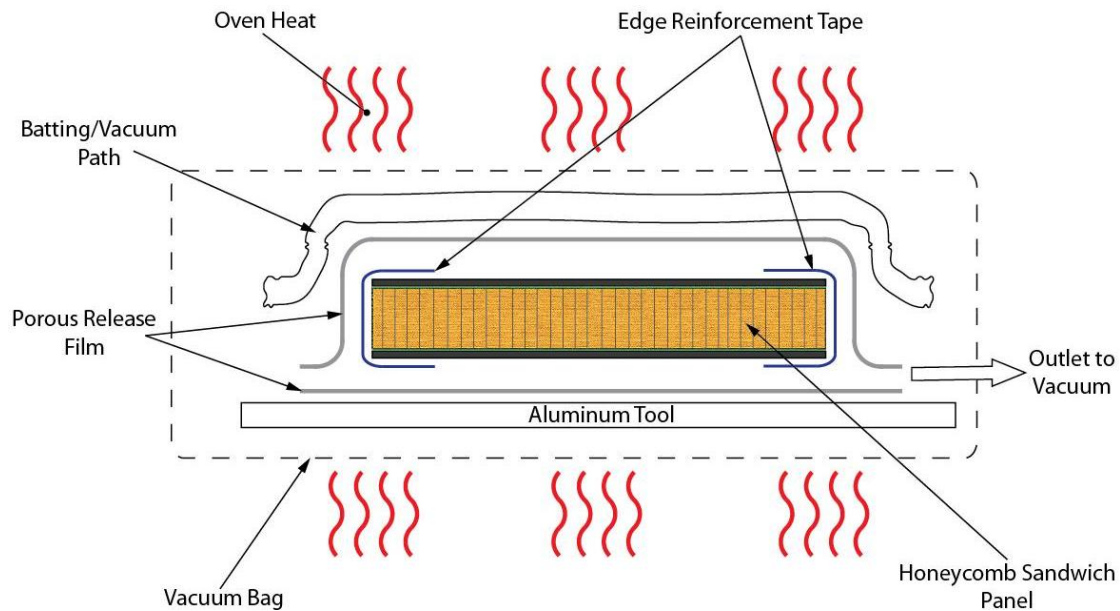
Preventing edgewise crushing of low density honeycomb cores through use of taped panel edges
